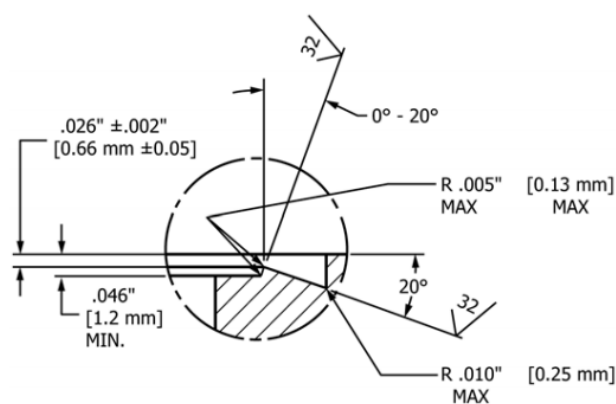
Dimension of CF knife edge according to ASTM E 2734 [ASTM2734]
